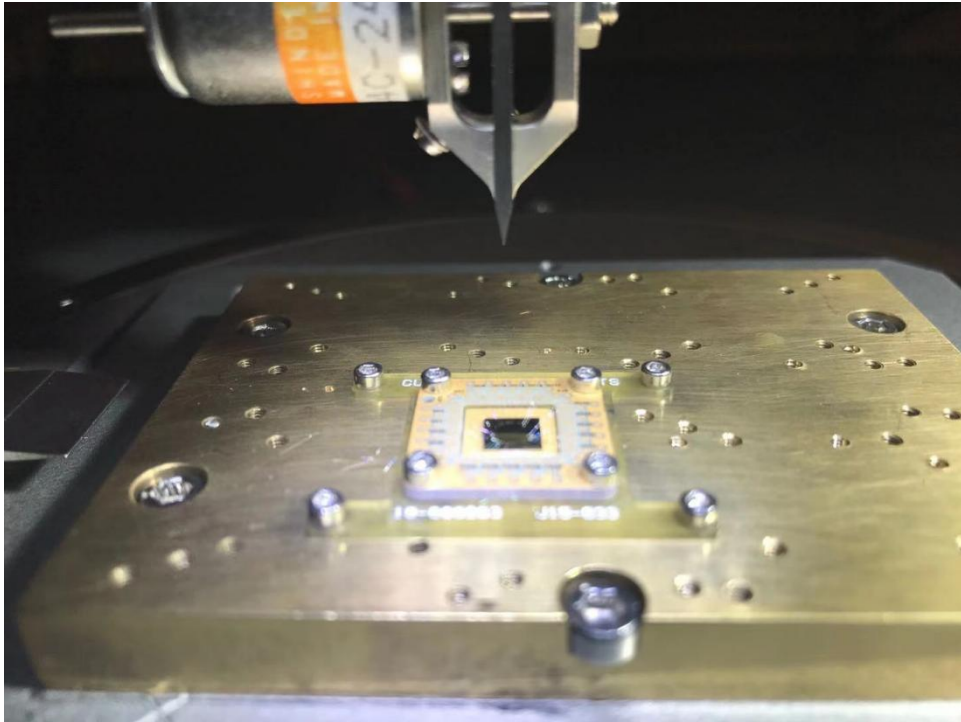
Image of a loaded chip during bonding. Each lead of devices on the chip is contacted with one pad on a daughter board.
